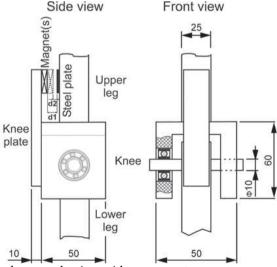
Drawing of the knee mechanism with permanent magnets.
